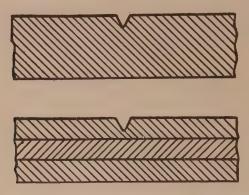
Fig. A.—Impact Test-Pieces cut from Cored Bars.
